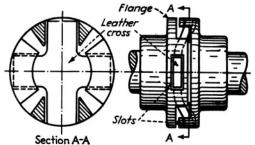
Similar to Fig. 274, being quiet in operation and used for low torques. This is also a design of Charles Bond Company. The floating member is made of laminated leather and is shaped like a cross. The ends of the intermediate member engage the two cored slots of each flange. The coupling will withstand a limited amount of end play.
